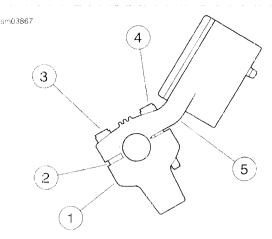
Handlebar Riser: XL 883C/XL 1200C
